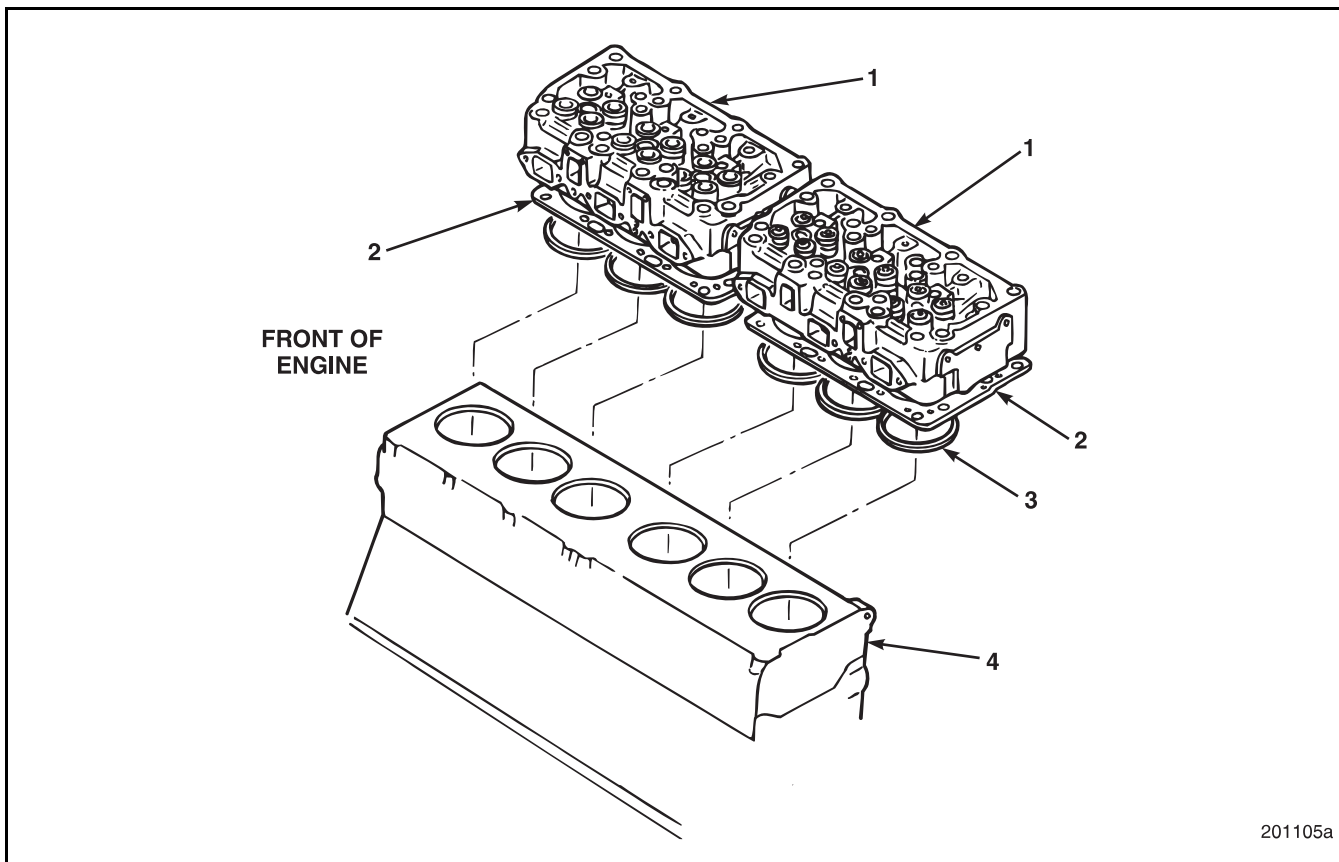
Cylinder Head Gasket and Fire Ring Positioning
